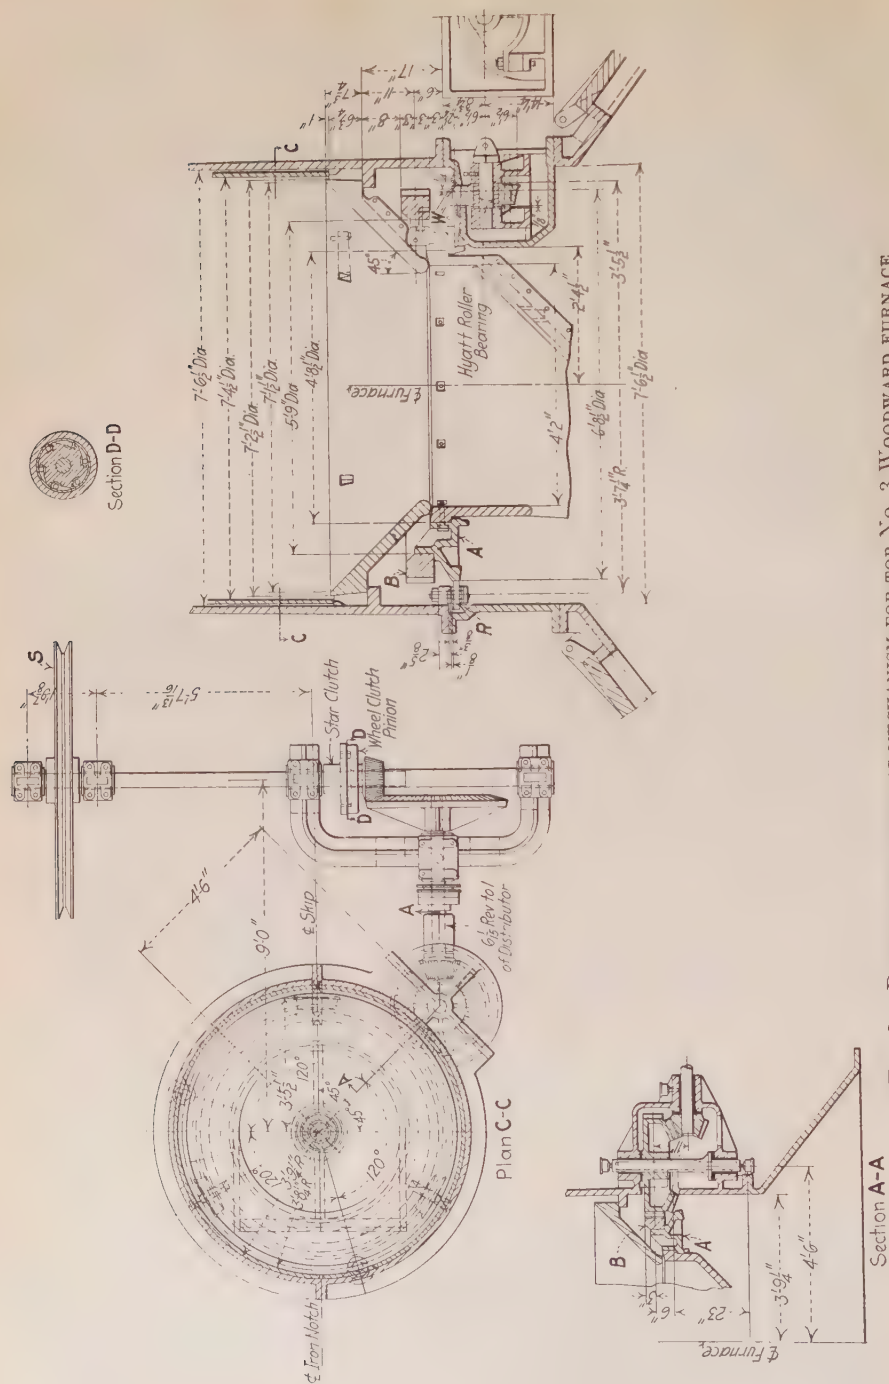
DISTRIBUTOR TURNING MECHANISM FOR TOP No. 3 WOODWARD FURNACE.
